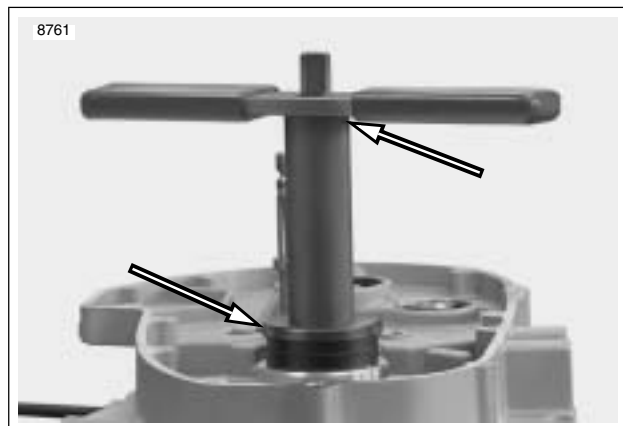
Sprocket Shaft Seal/Spacer Installer (Part No. HD-42579 and B-45676)
